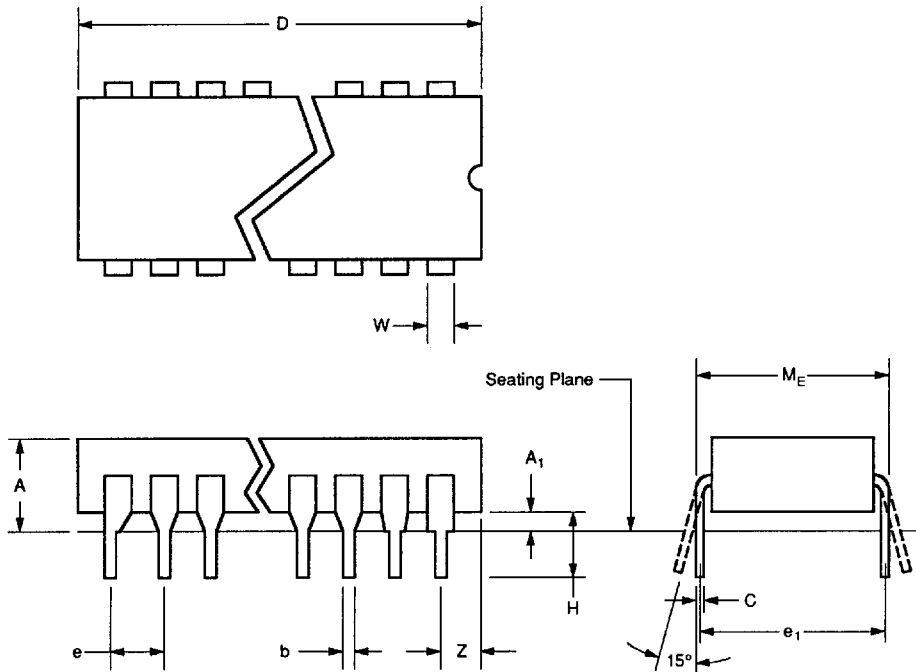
16-Lead Ceramic DIL (Solder Seal) - Package Style C
